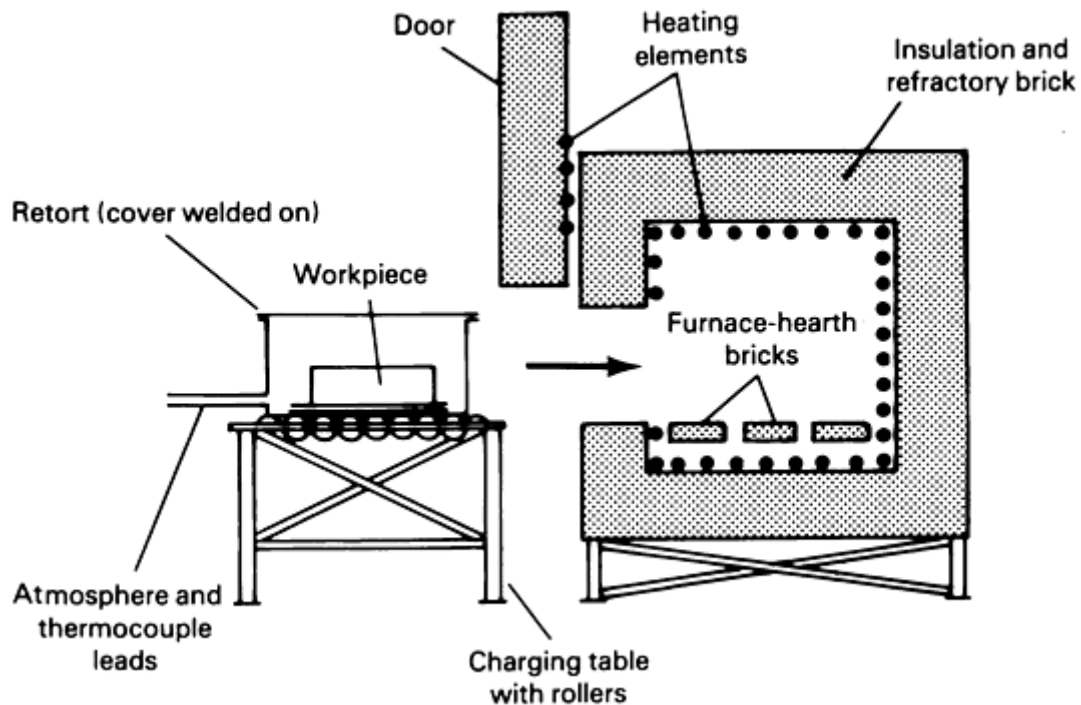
SEALED RETORT ABOUT TO BE LOADED INTO ELECTRIC-FIRED BOX FURNACE IN ORDER TO BRAZE A WORKPIECE IN A CONTROLLED ATMOSPHERE
